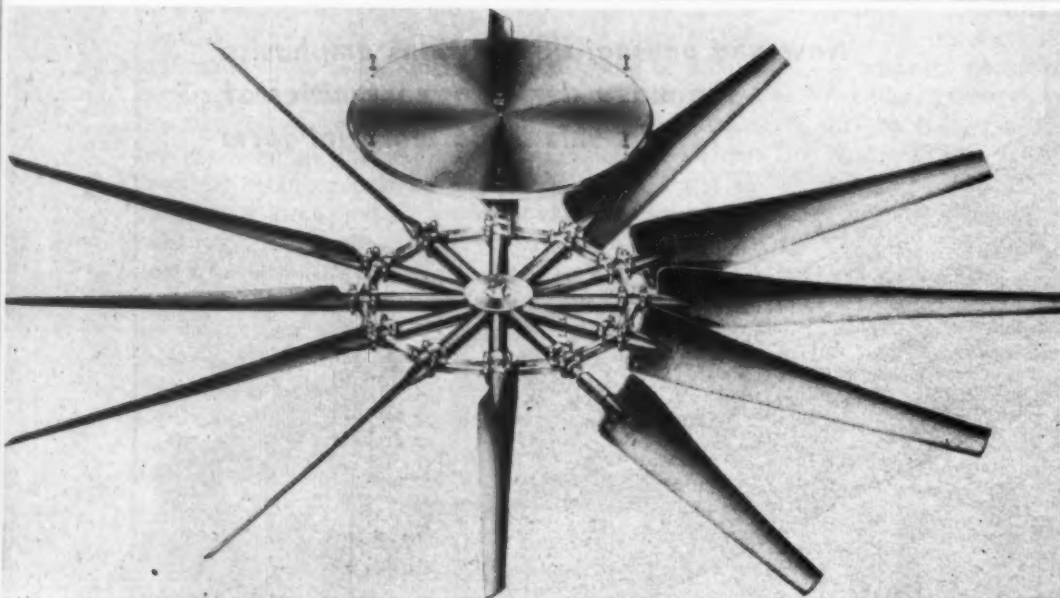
Left — Tubular spokes in the welded hub of this 72-inch, 12-blade fan absorb complex bending loads
